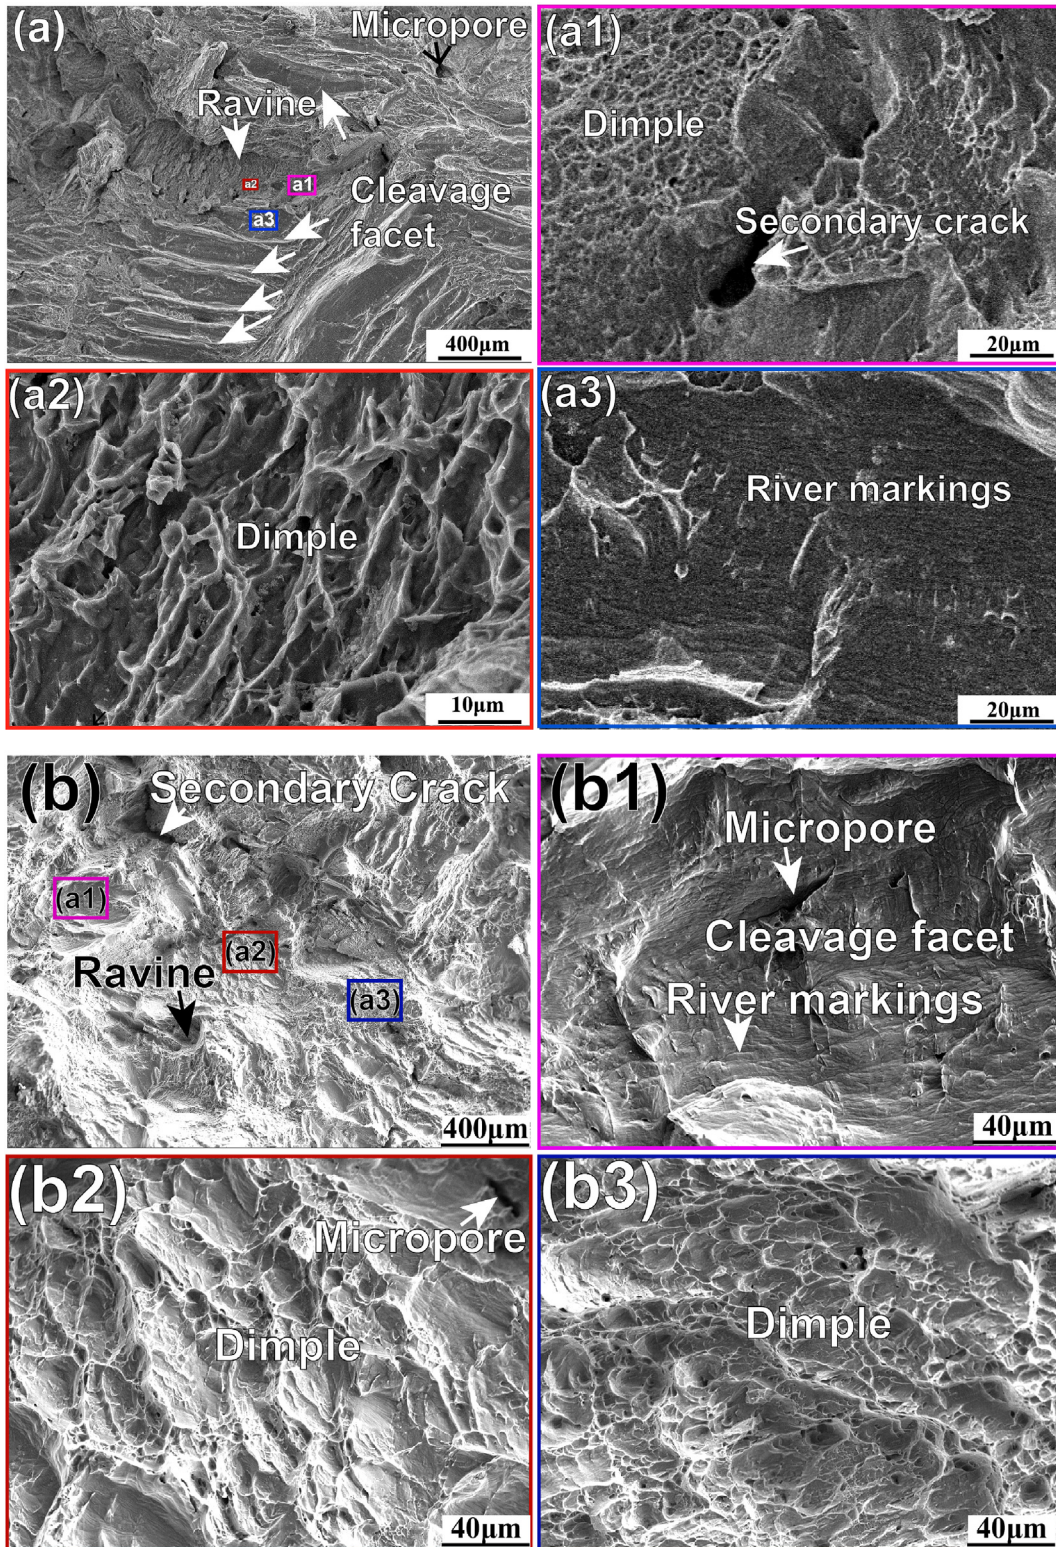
Fracture surfaces of (a-a3) TC4 and (b-b3) TC4F alloys after mode-I fracture toughness test.
